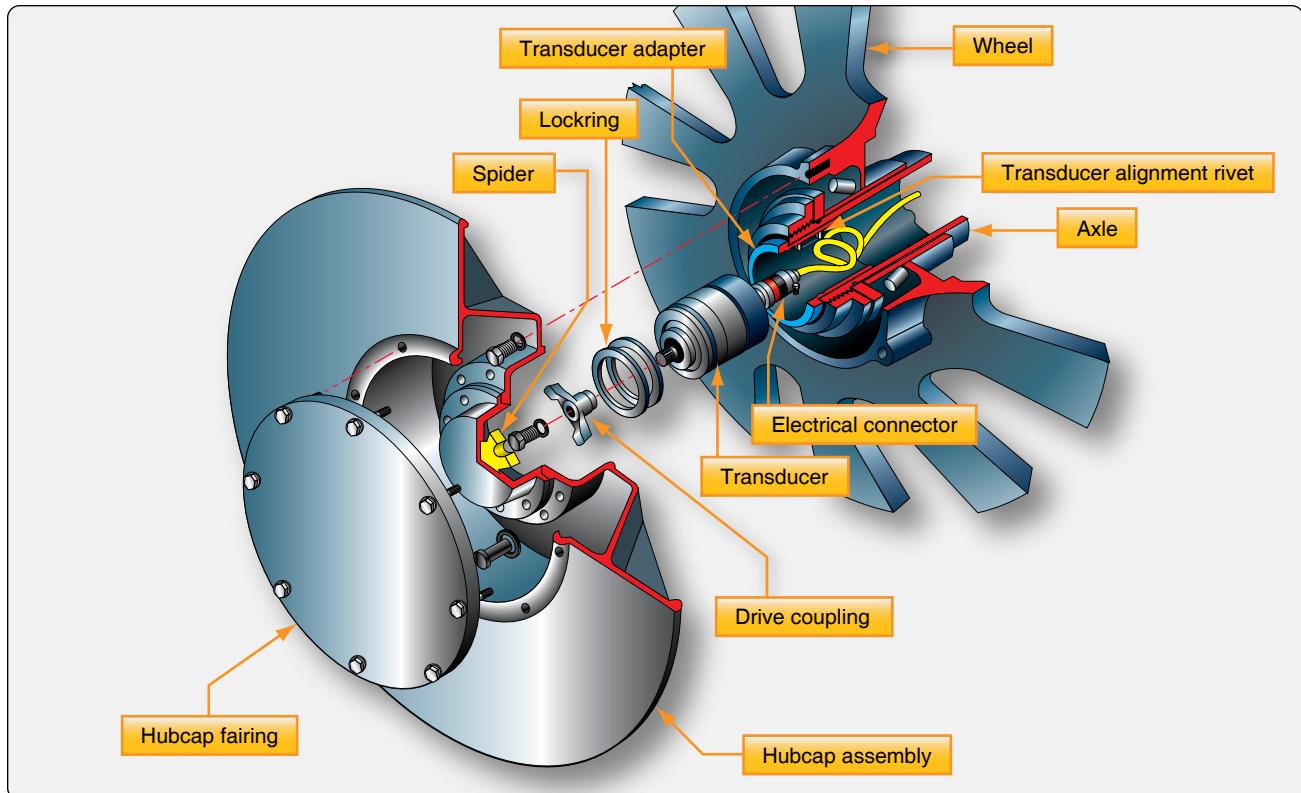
The stator of an anti-skid wheel sensor is mounted in the axle, and the rotor is coupled to the wheel hub spider that rotates with the wheel.
